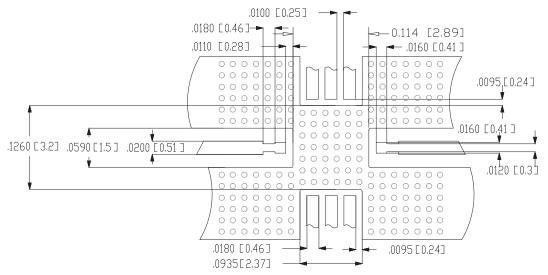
Suggested PCB Land Pattern and Stencil Layout
